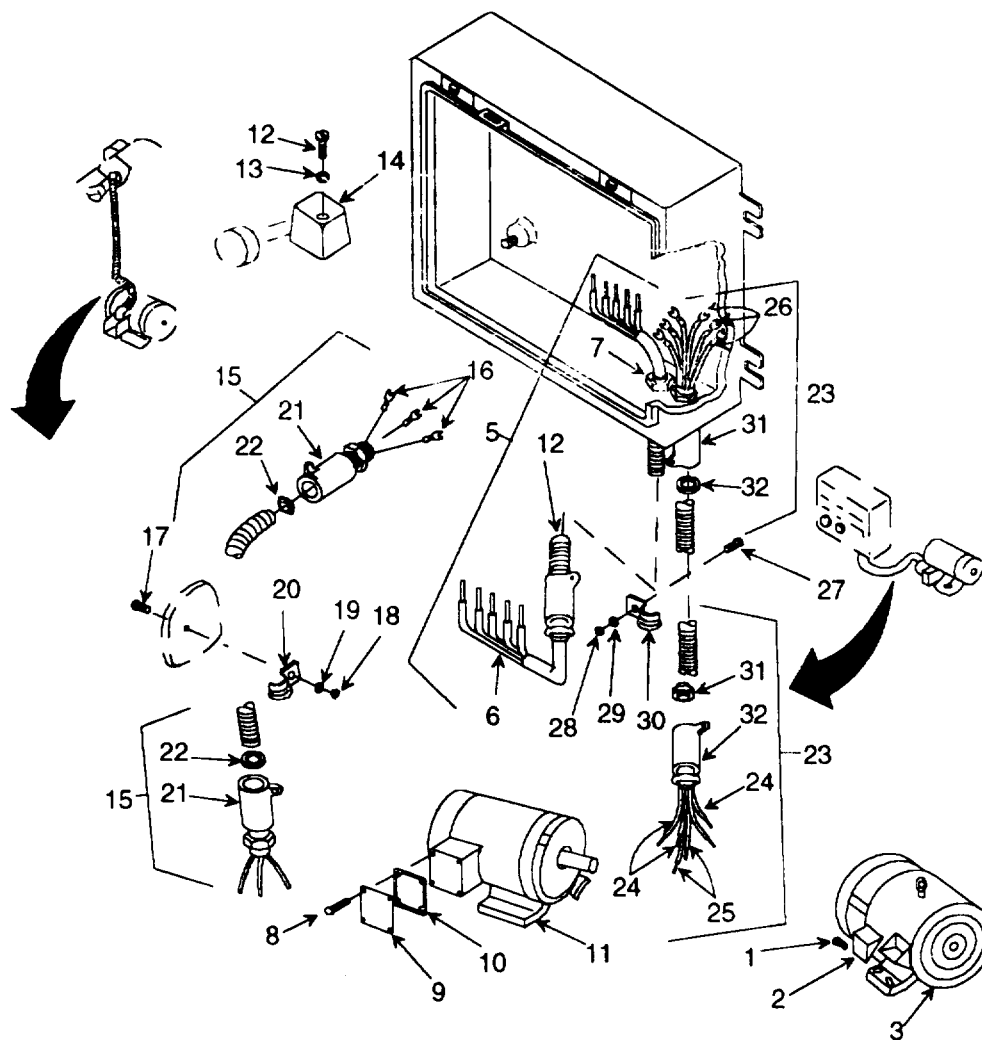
Cable Assembly (Alternating Current), Removal / Installation.
